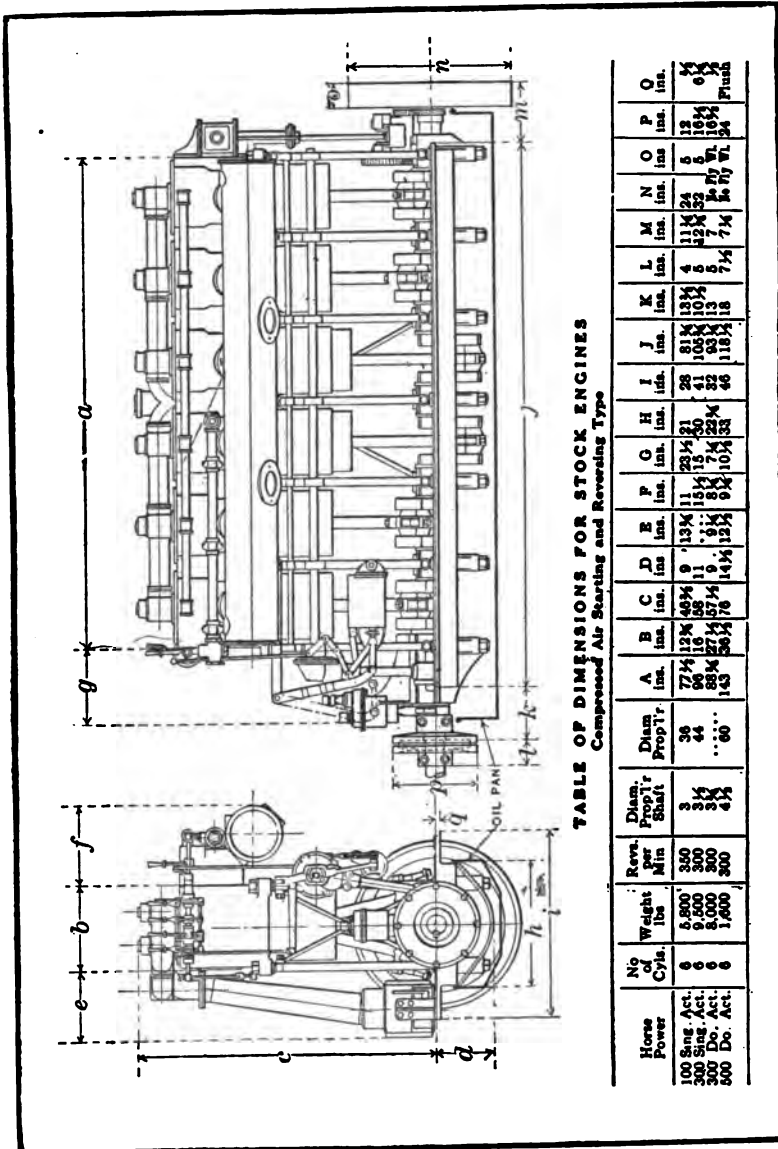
Table of dimensions of Standard reversing type marine engines.
